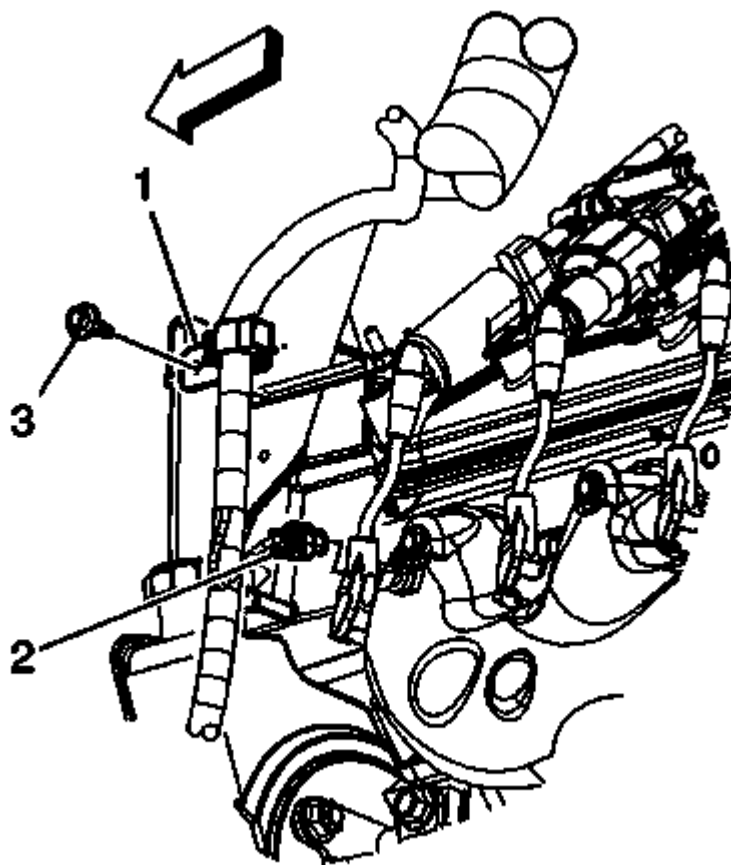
Engine Wiring Harness, Clip, Bolt And Connectors
